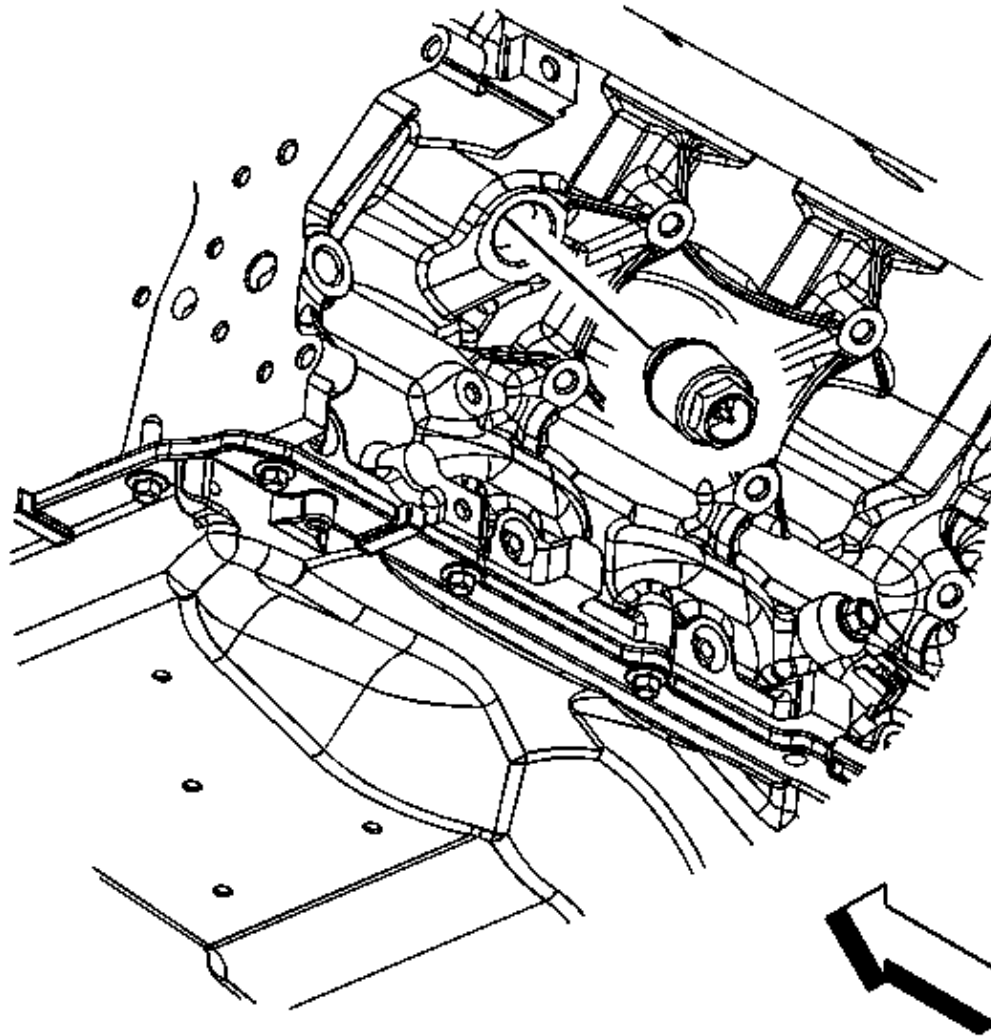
Locating Oil Cooler Hose Bracket & Adapter Bolts
